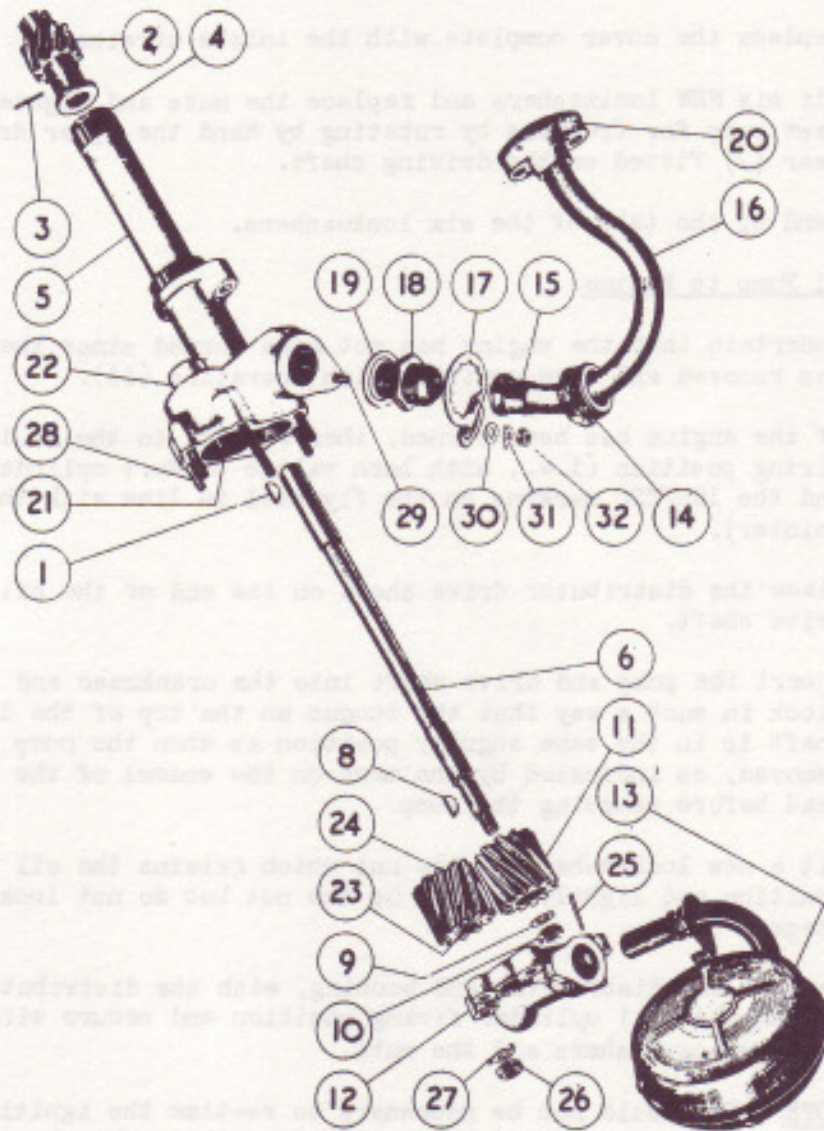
OIL PUMP AND DRIVE DISMANTLED.
